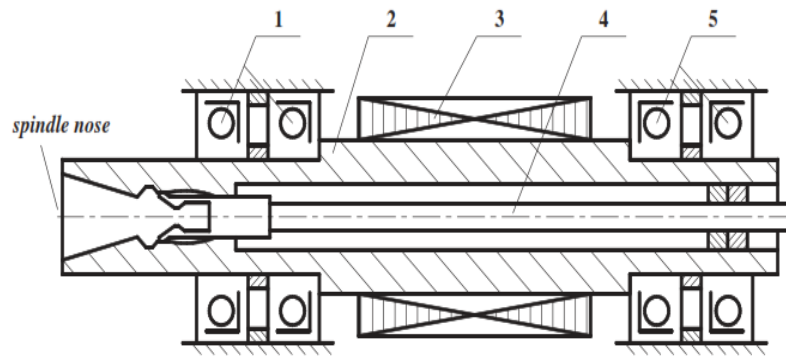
Schematic view of the integrated spindle-tool unit [55]
